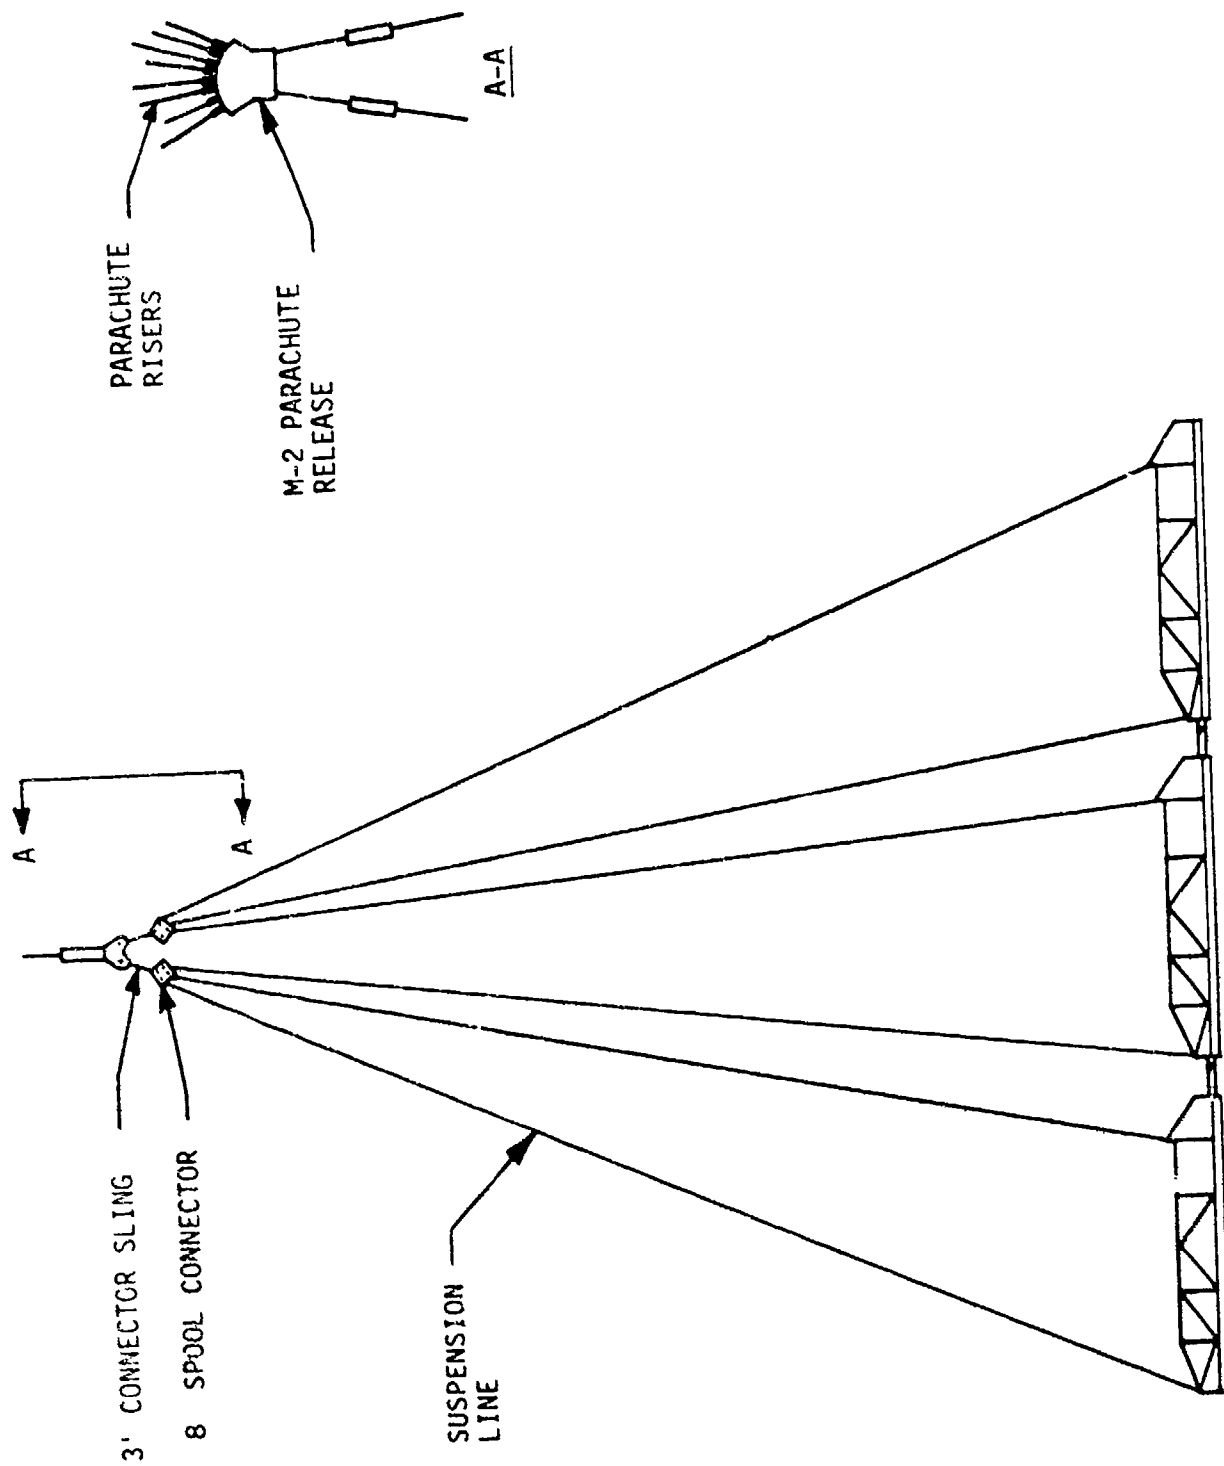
Arrangement of Suspension Lines - 3-Platform Assembly
